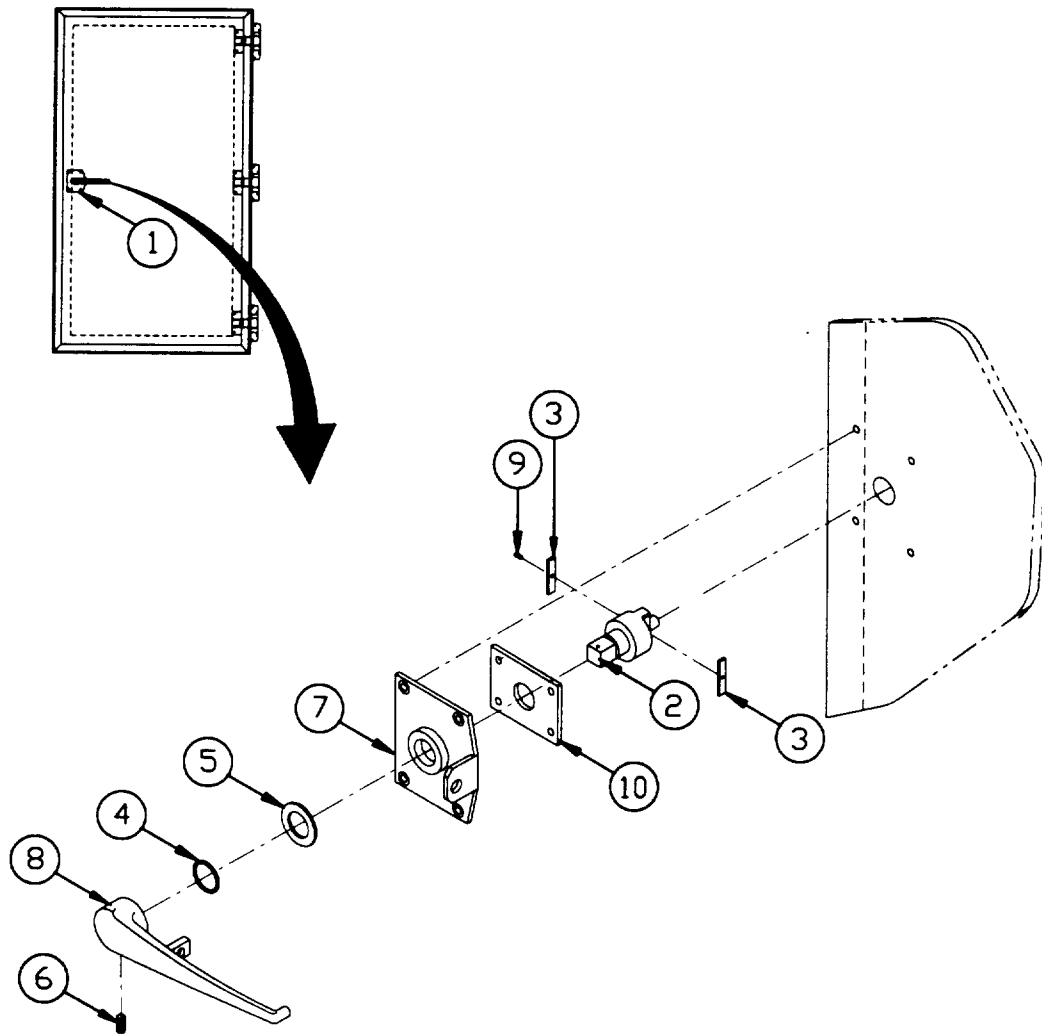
HANDLE ASSEMBLY, DOOR OUTSIDE
